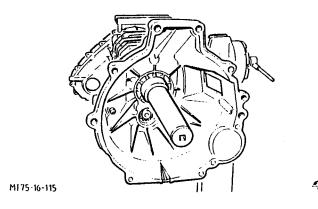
Remove clutch release bearing guide sleeve using Special Tool 16-040.
